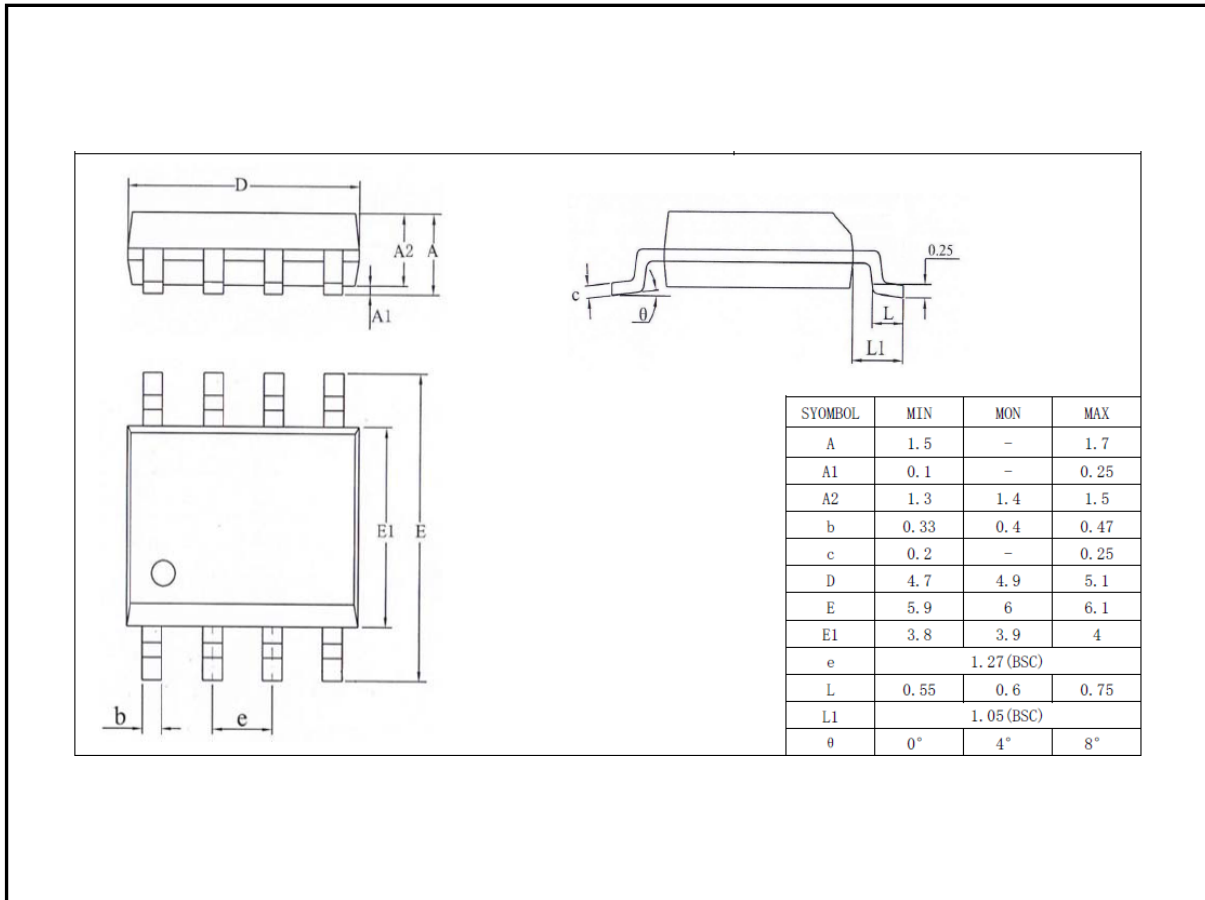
SOT23-8L Mechanical Data and Package Dimensions
